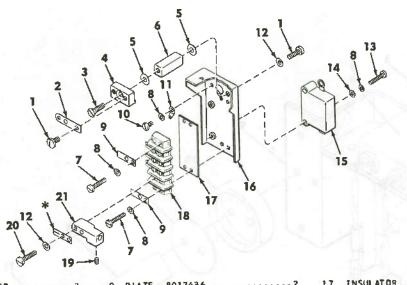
PLATE /9015692/-EXPLODED VIEW /SEE FIGURE 124 FOR NEXT MIGHER ASSEMBLY/
